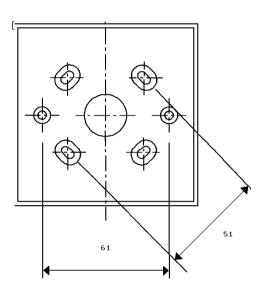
MCP820M Fixing Dimensions Surface Mount Backbox
